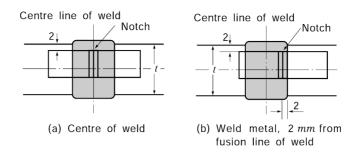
Position of Impact Specimen (Unit: mm, t = Plate thickness)
